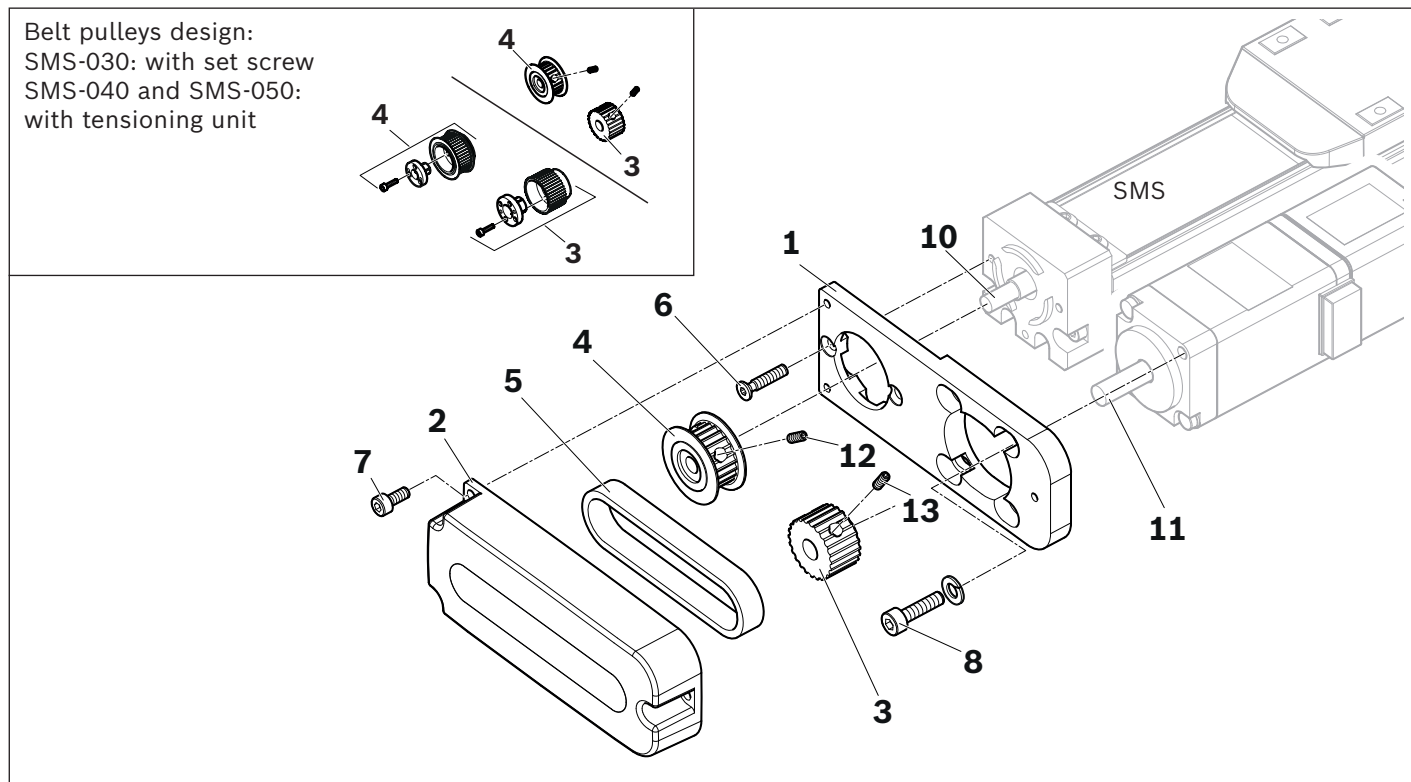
Mounting the SMS-030 – SMS-050 belt side drive
